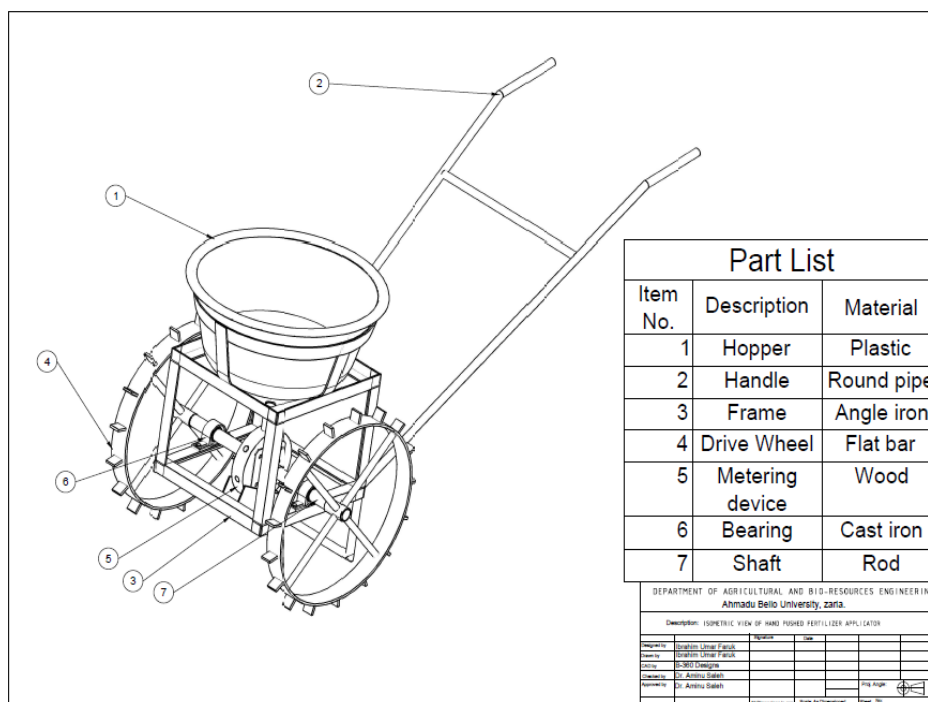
Isometric Drawing of the Hand-Pushed Fertilizer Applicator
